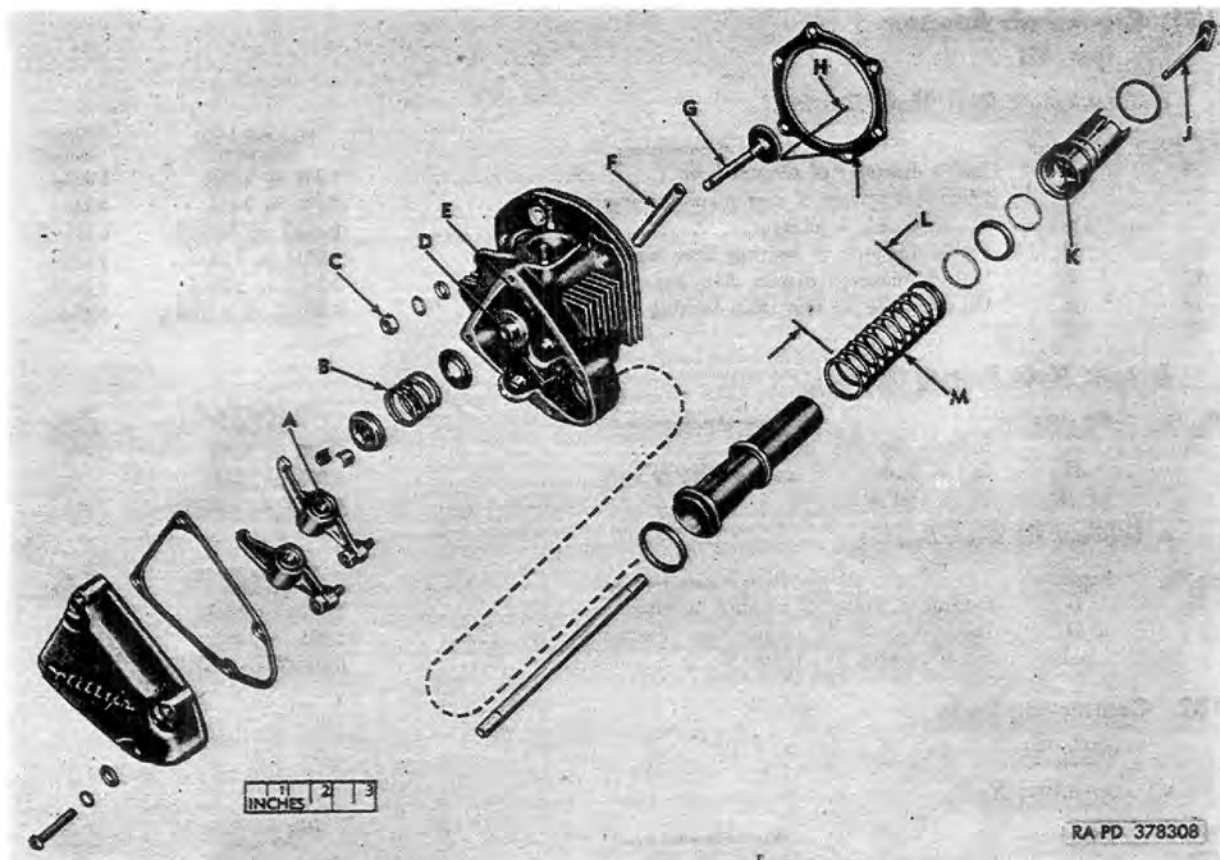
Repair and rebuild standard points of measurement for cylinder head and valve components.
